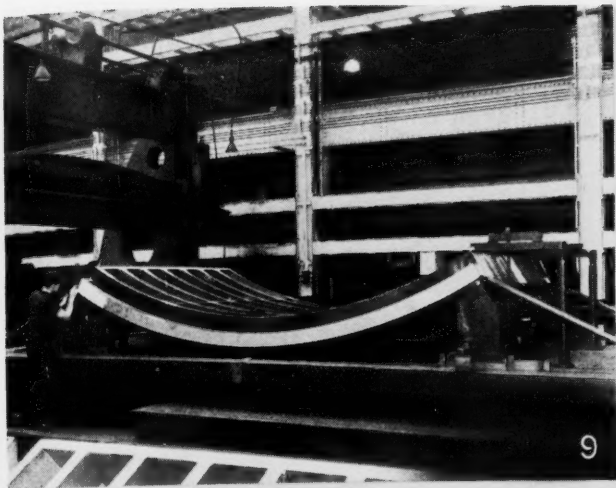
Marking the Finish Lines for the Partings on the Gate Segments after They are Planed. Fig. 10. Machining the Gate Segments on the Parting Surfaces. Fig. 11. Drilling and Spot-facing the Bolt Holes in the Partings of the Segments. Fig. 12. Boring Mill Used for Machining the Gate
